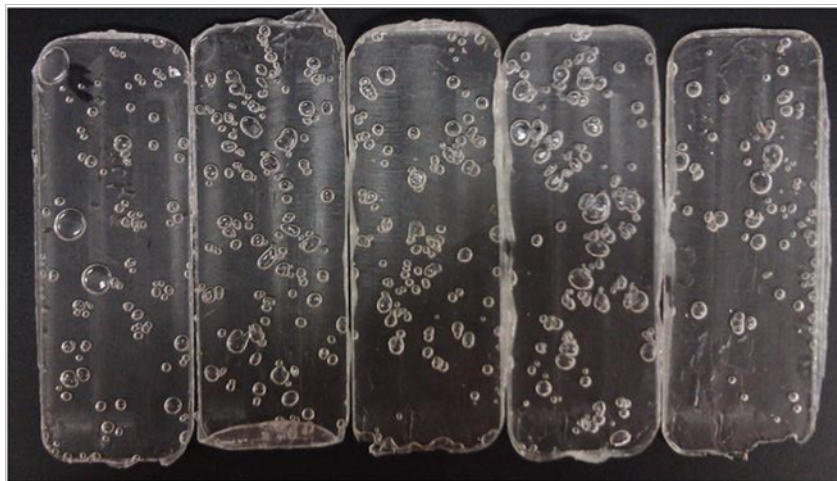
Compression molded PLGA sheets used to produce staples and test specimens
